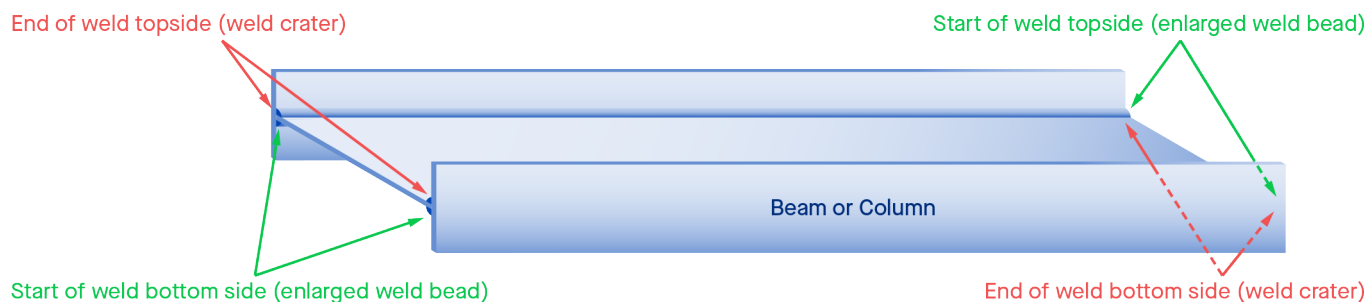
Location of non-usable sections due to weld start/stop conditions.
